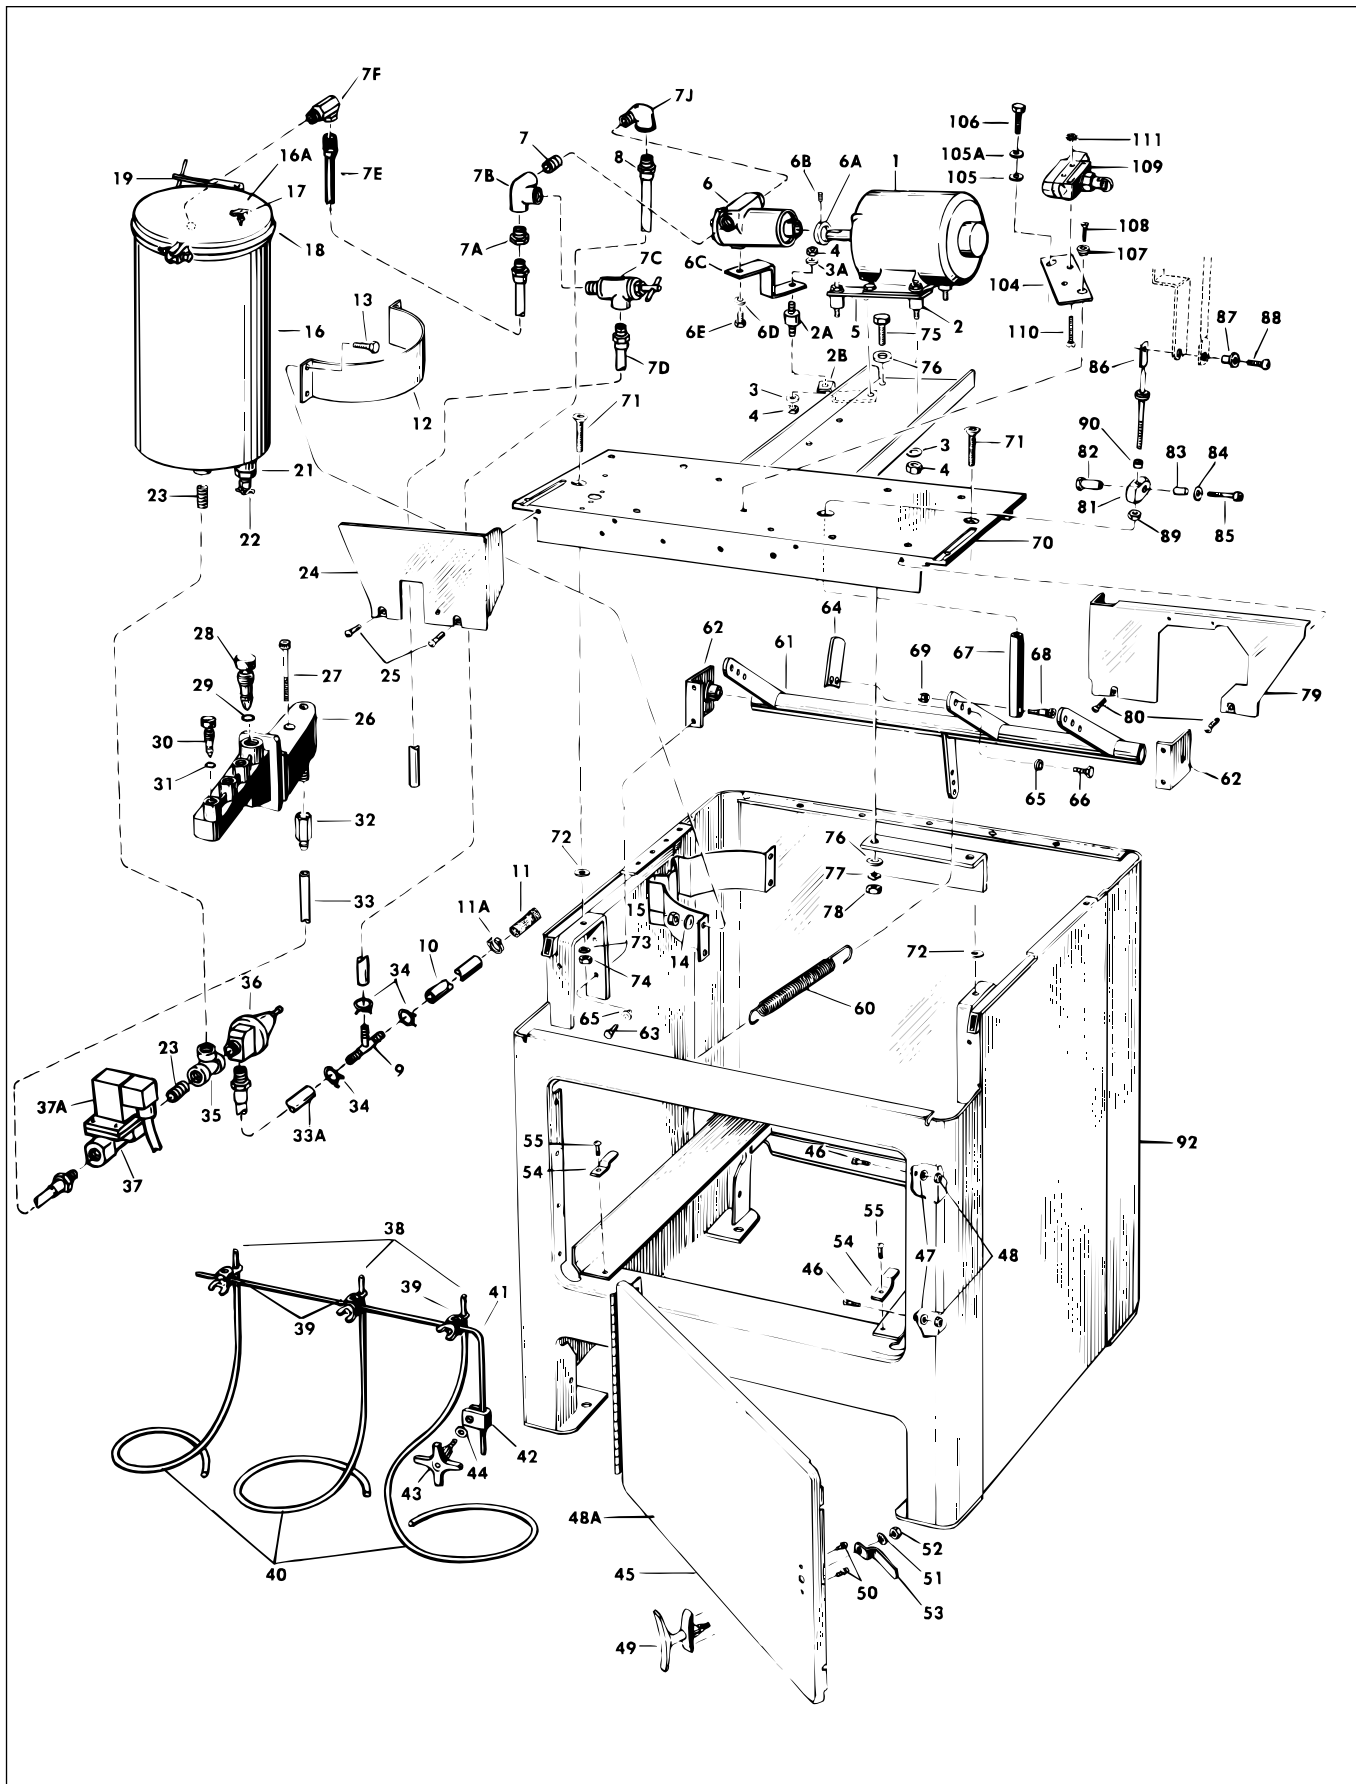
FIGURE E - BASE, FILTER, PUMP, & COOLANT ASSEMBLY
